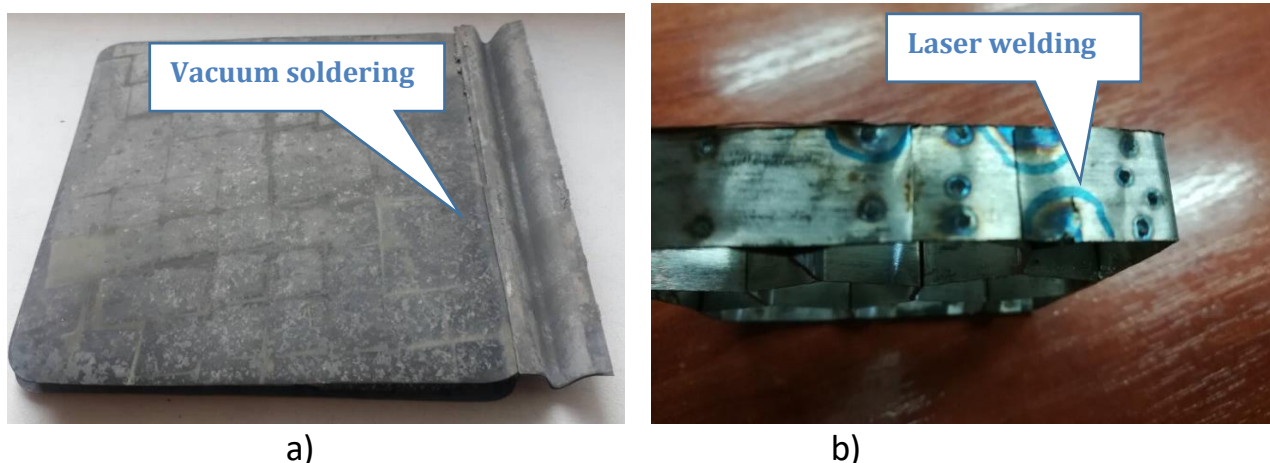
Combined design of the fragment of the heat shield: a) heat shield element with U-compensator; b) honeycomb filler connected by laser welding
